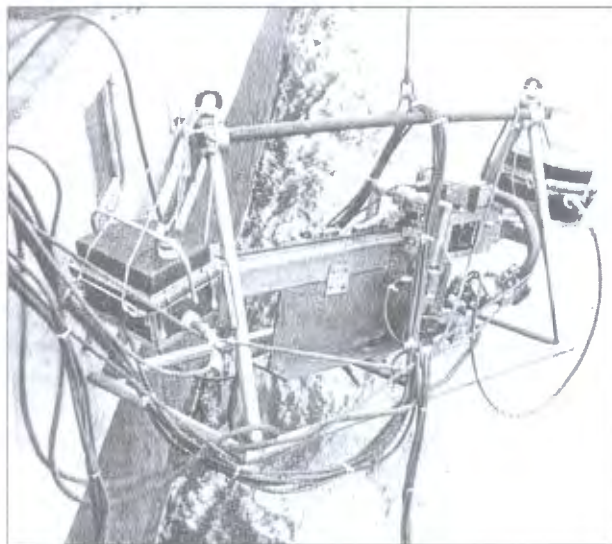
Unit A1802 for welding ship-lifting lugs
